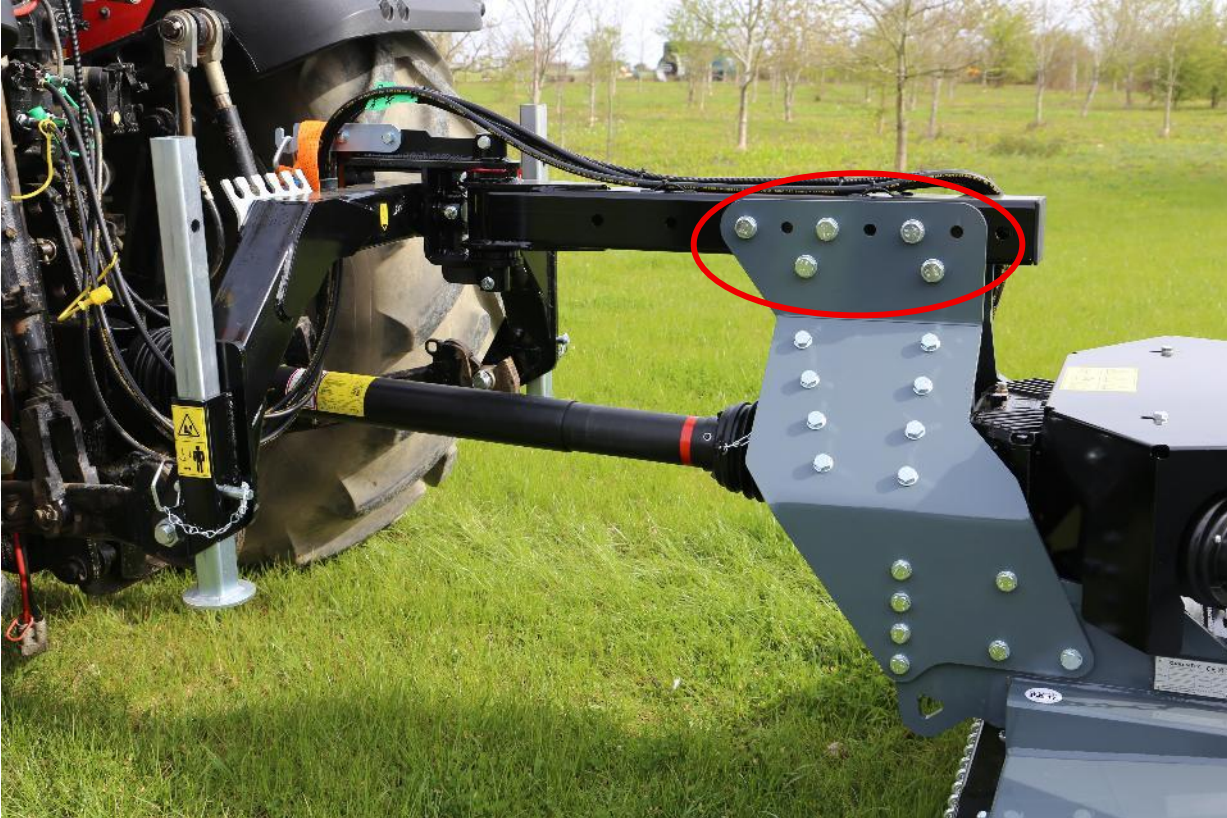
Position of the hitch assembly (black) and bolts used to adjust the position in relation to the headstock (grey).
